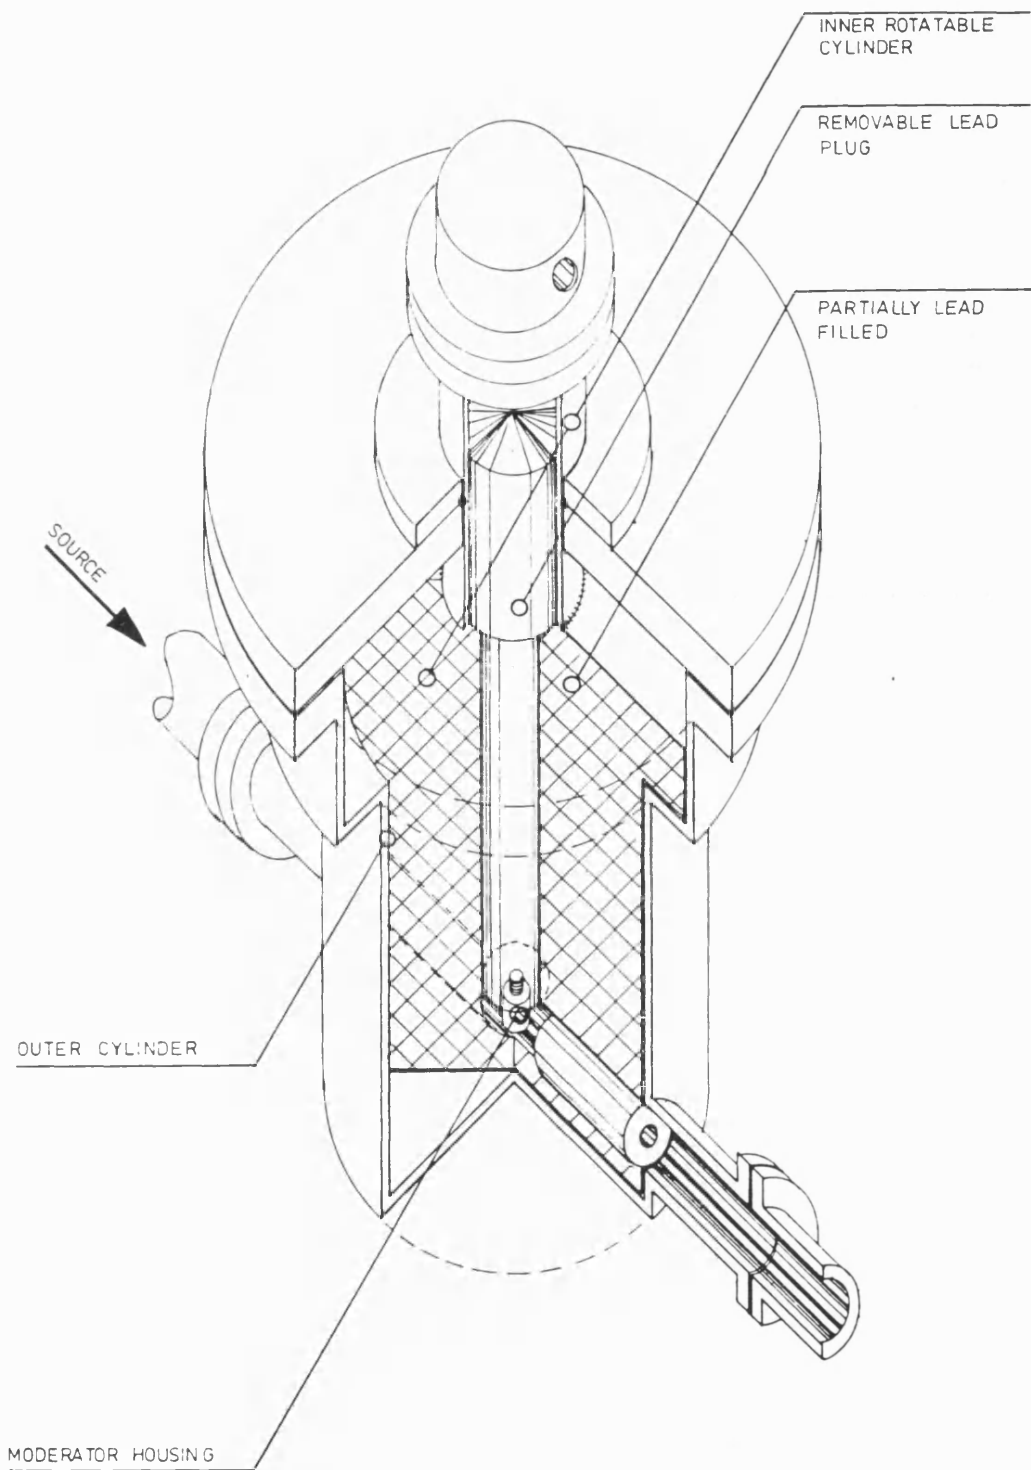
A cutaway diagram of the chamber housing the source and moderator assembly.
